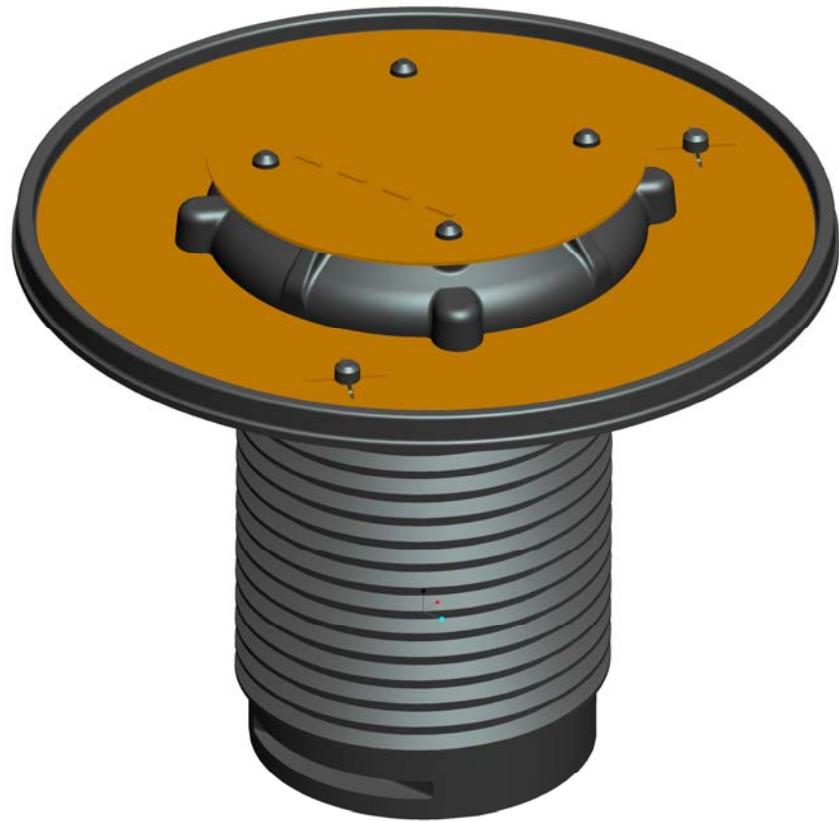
Antenna Lower Housing Assembly with Antenna Assembly Fastened
